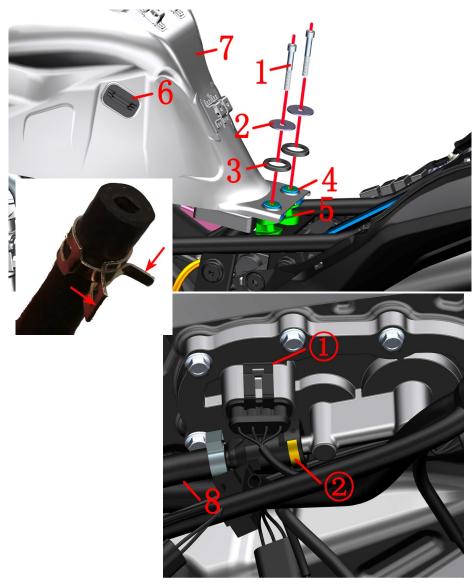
FUEL TANK LINER ASSEMBLY		Bully component in the fuel tank	CHK	(0)
